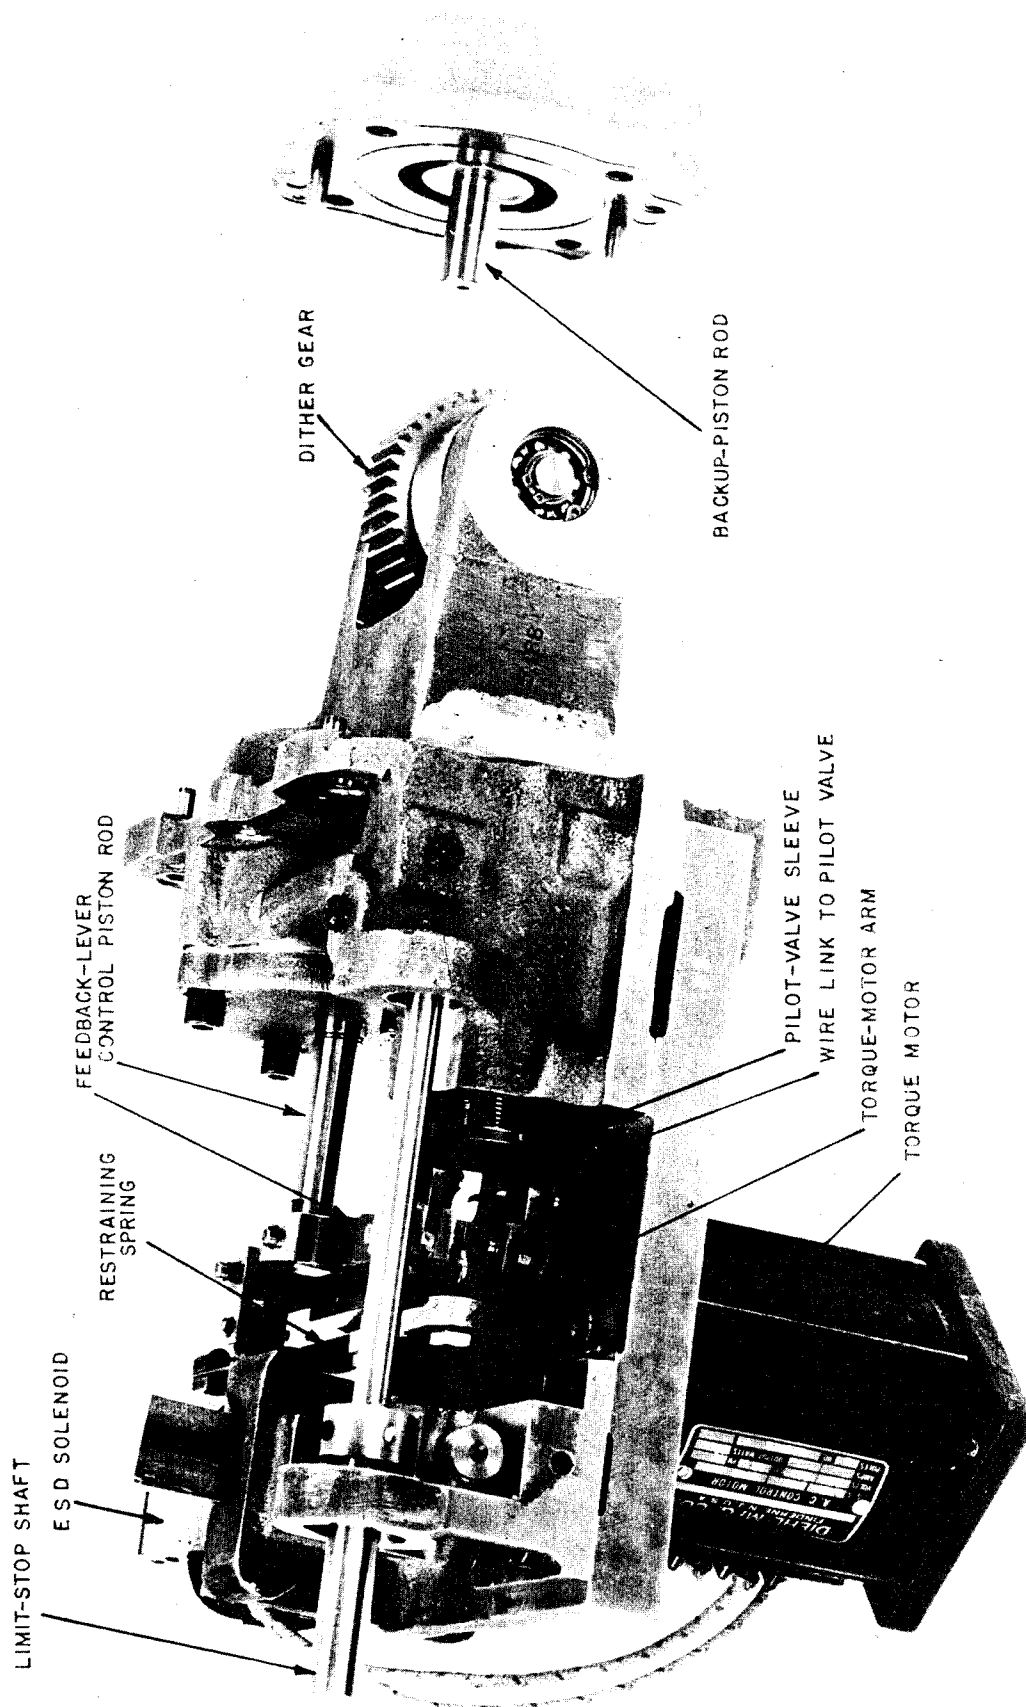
EMERGENCY-ROD DRIVE - STROKE CONTROL
